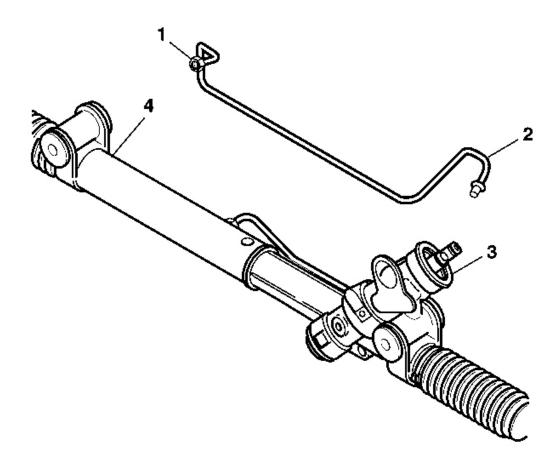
Identifying Larger Cylinder Line At Valve Housing Courtesy of GENERAL MOTORS CORP.
